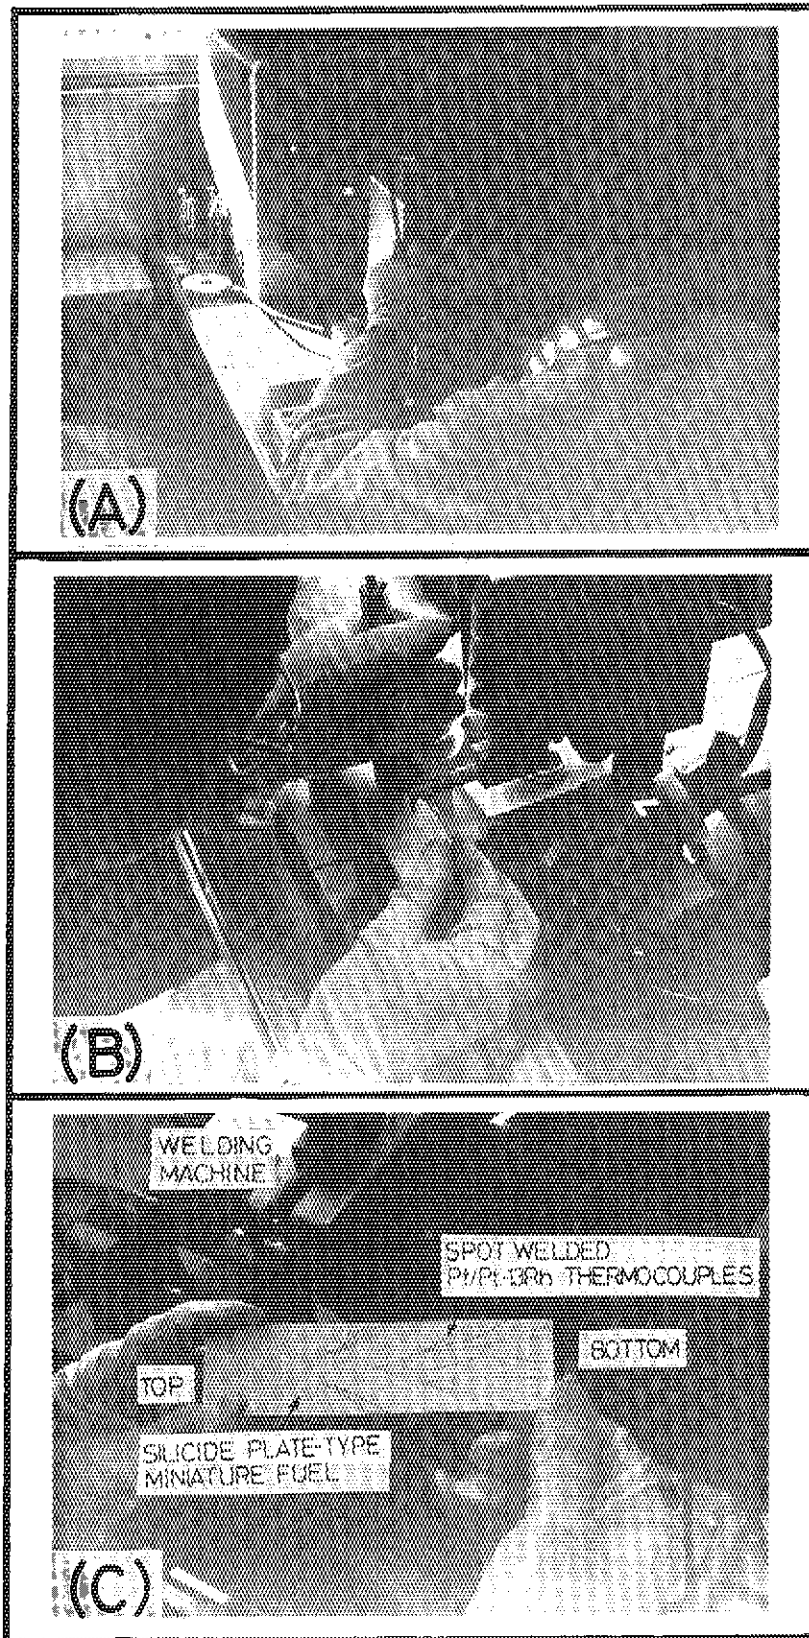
Process of Pt/Pt-13%Rh resistant welding on aluminum cladding surface. (A) Overview of work, (B) Welding, (C) Welded five thermocouples, where supplied electric powers were 5 Ws for anode and 6 Ws for cathode.
